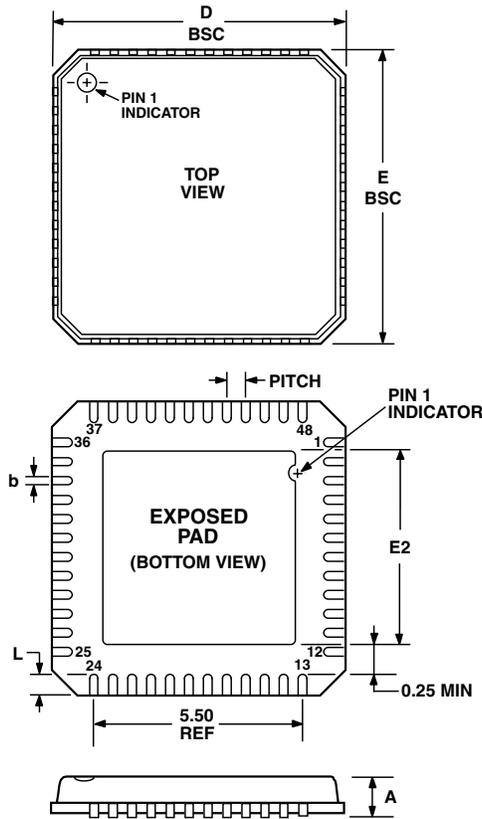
LFCSP Outline Drawing (JEDEC MO-220)
